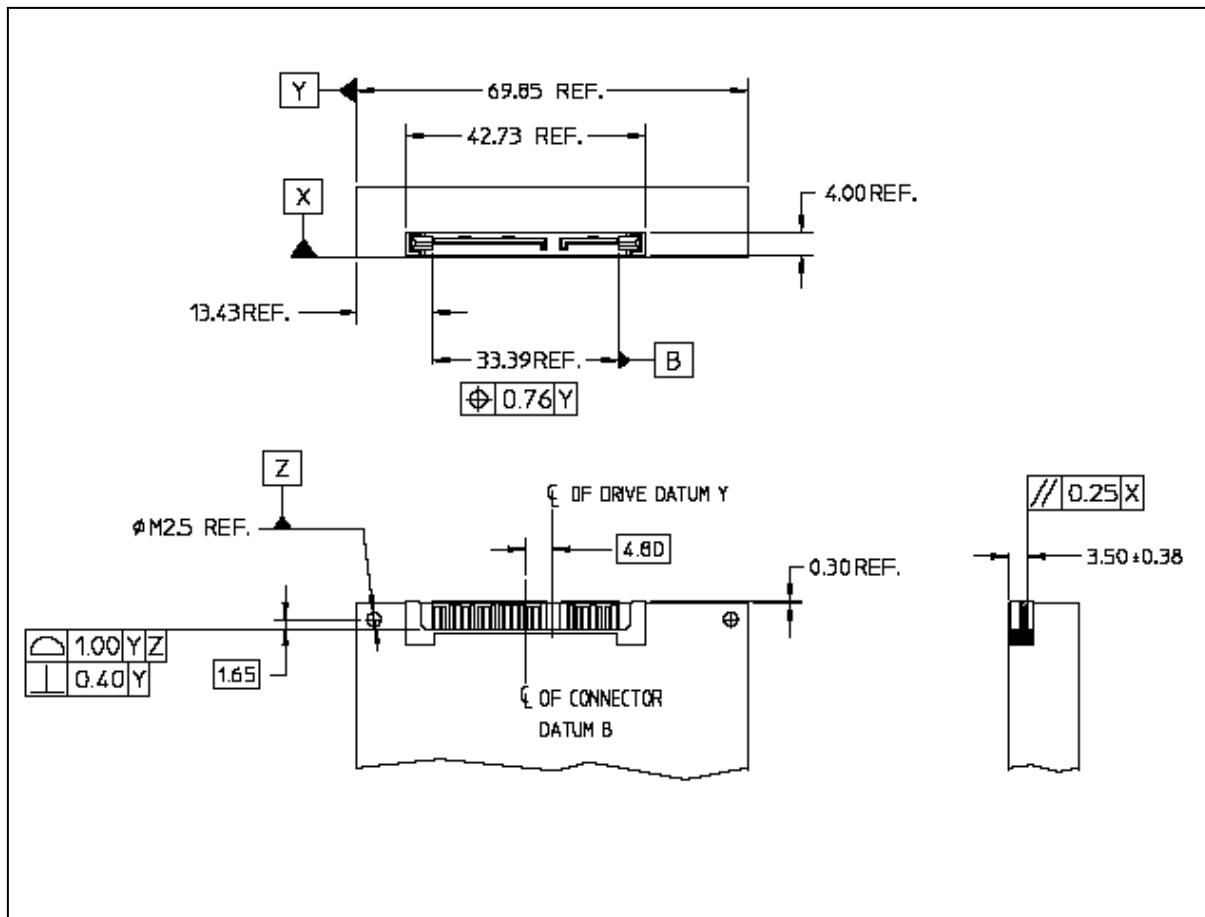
Device plug connector location on 1.8 inch bottom mounted device
